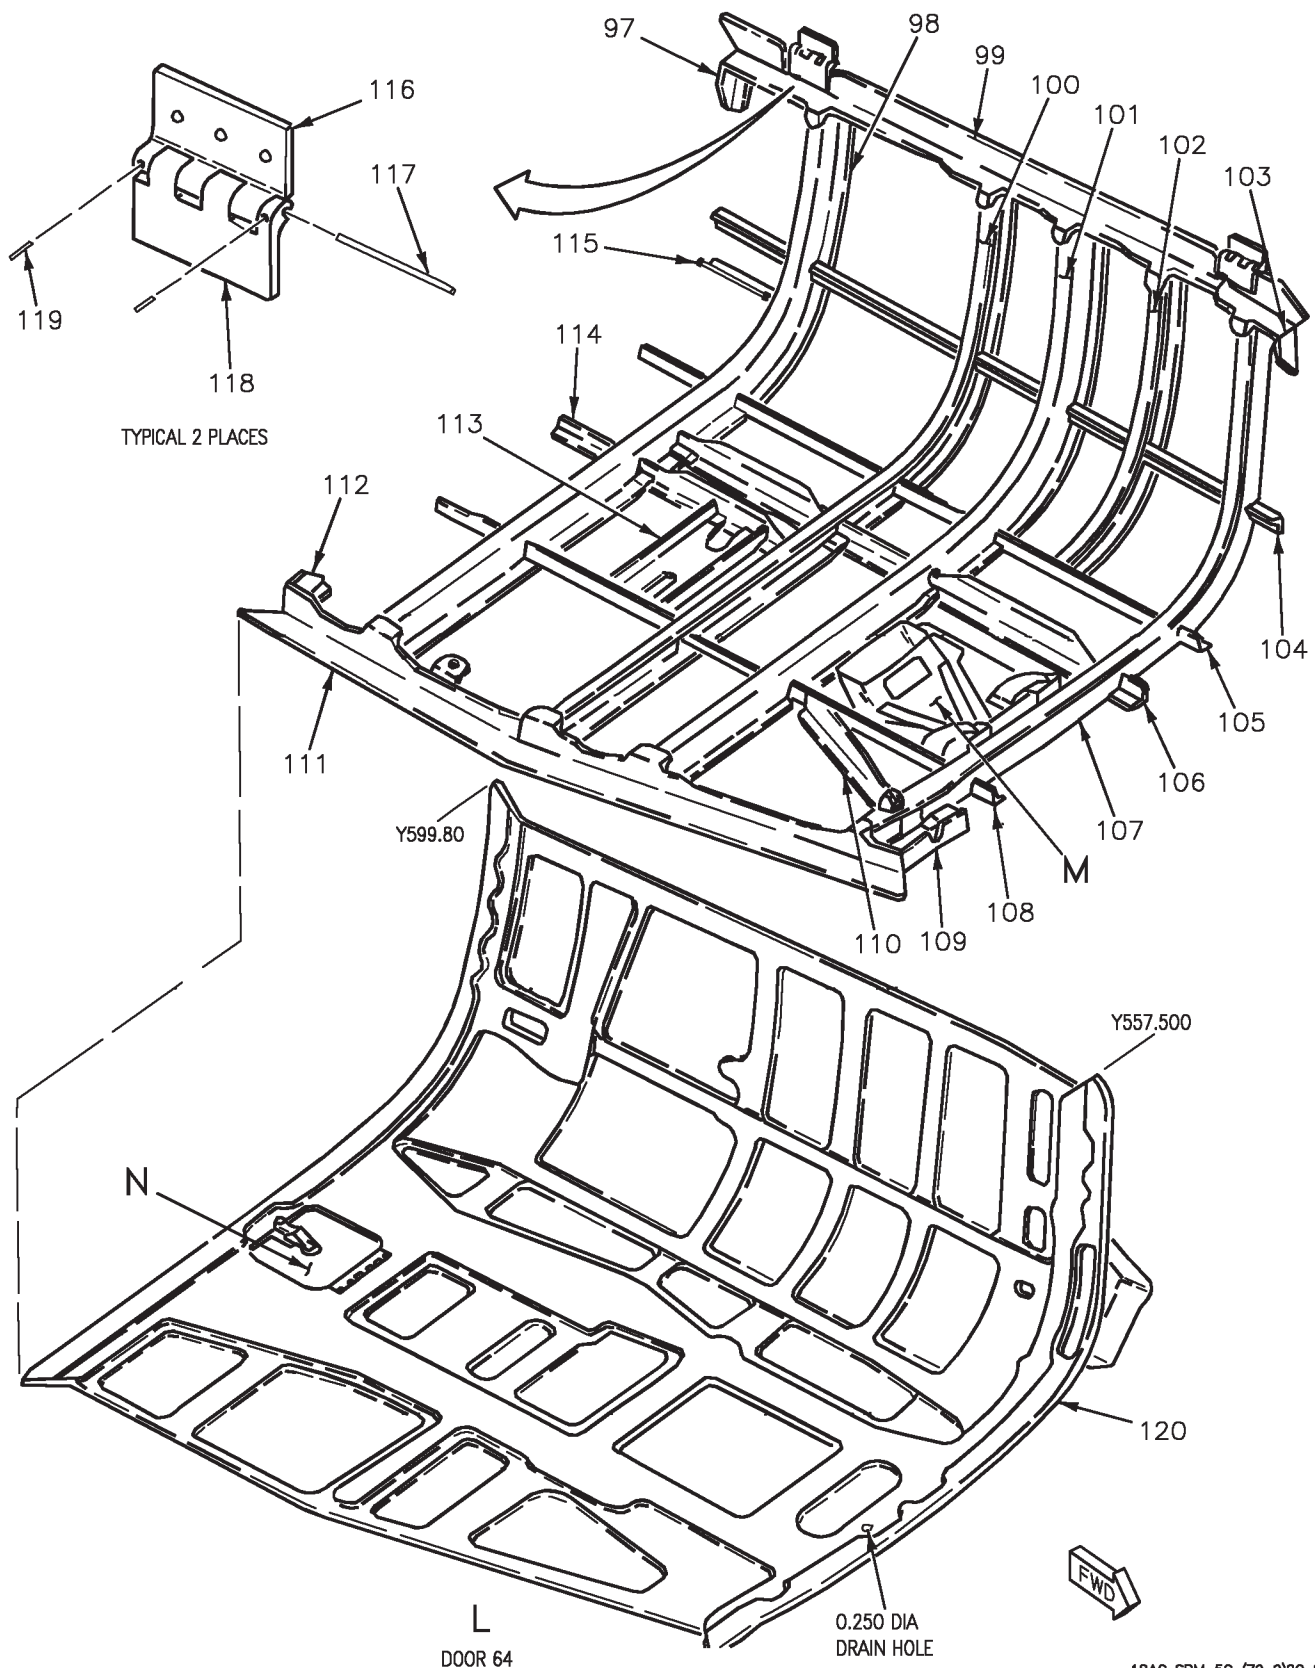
Aft Fuselage Corrosion Prone Areas (Sheet 9)
